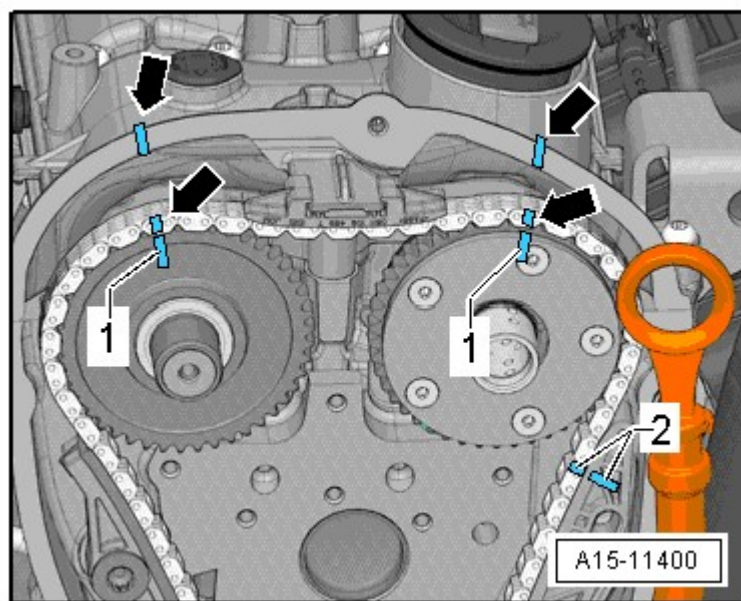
Marking Camshaft Timing Chain Andcylinder Head
